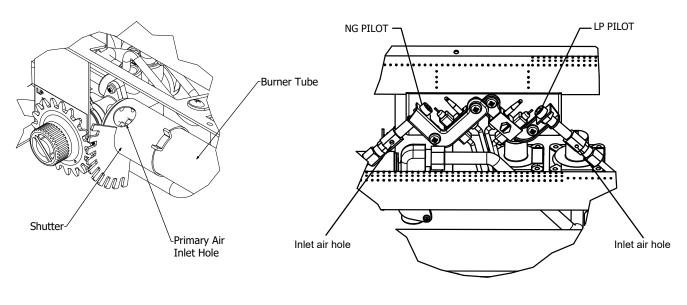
Primary Air Inlet Slot on Burner Tube
